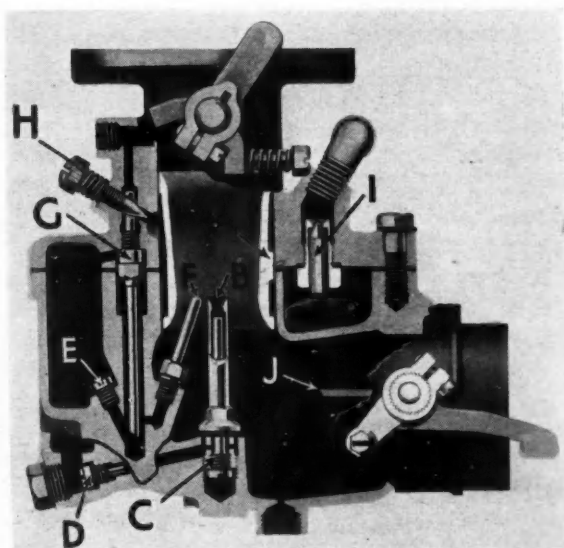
(Center) — Section through axis of carburetor barrel and air inlet + + + +
